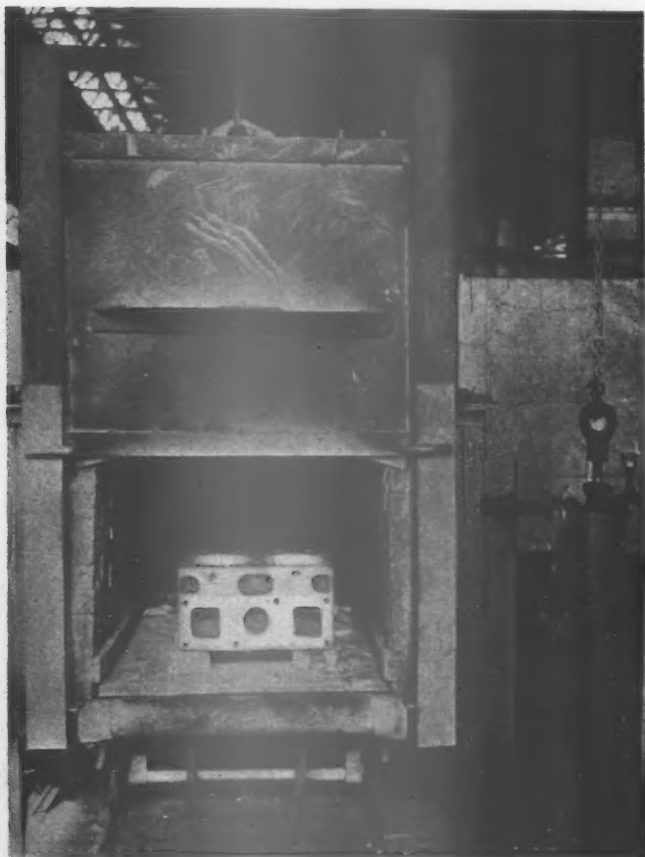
Small car-bottom, oil-fired pre-heating furnace used in connection with cast-iron cylinder-head repair
